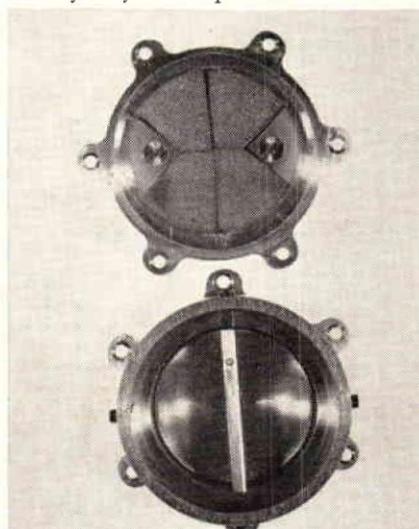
Internal view of torque absorber showing the elastomer inserts in the top section and the vane attachment in the bottom section.
